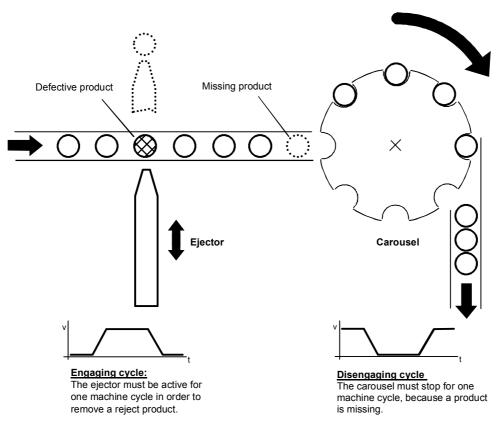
Application Example of Engaging/Disengaging Cycle for Removal of Reject Products in a Packaging Machine
